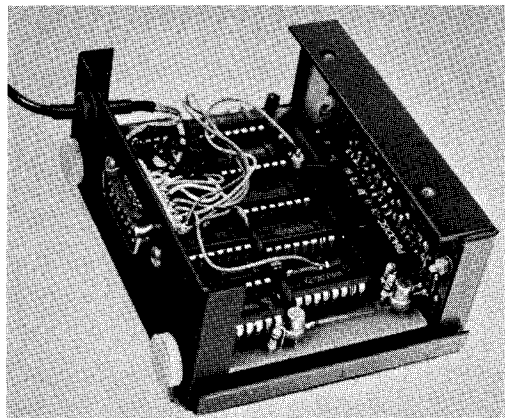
Internal view of the counter/display assembly showing the compact construction
